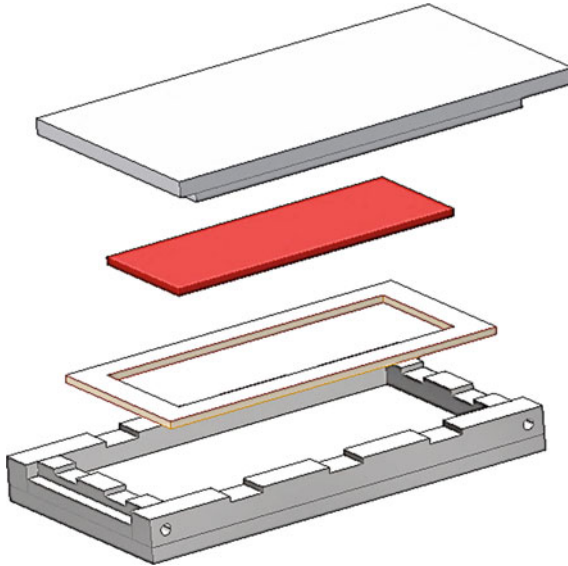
Exploded view of the bulk specimens' mould: steel plates, silicone rubber frame and the adhesive plate [51]
